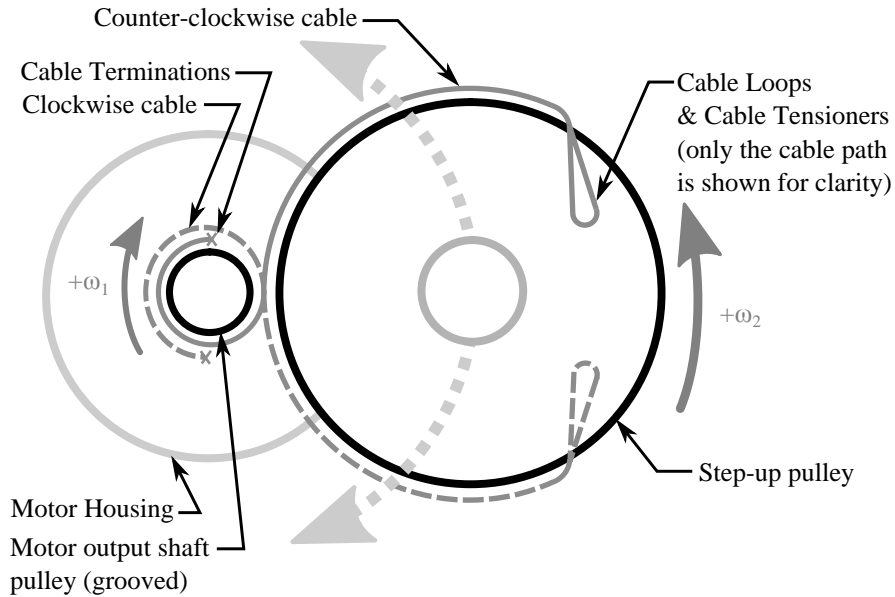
Schematic view of First Stage of Epicyclic Cable Drive transmission. The large step-up pulley rotates around the smaller motor output shaft pulley, driving the second stage of the transmission. The large step-up pulley here is clamped to the small step-down pulley in the second stage. Each tension member (solid and dashed grey) are single lengths of stainless steel cables looped back on themselves yielding two tension members. Not shown is the pulley carrier that constrains the step-up and step-down pulleys to rotate around the motor housing and motor shaft
